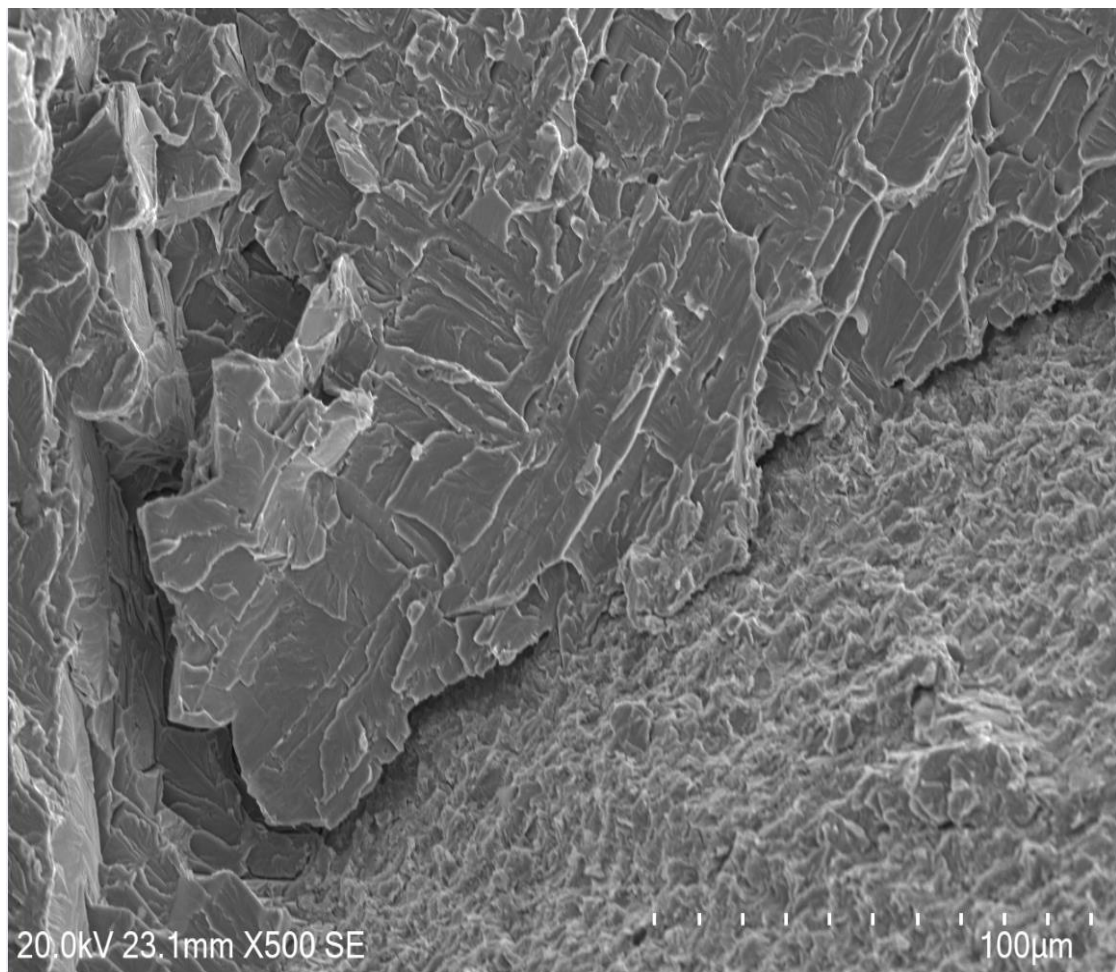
SEM fracture surface of 10005 steel specimen.
